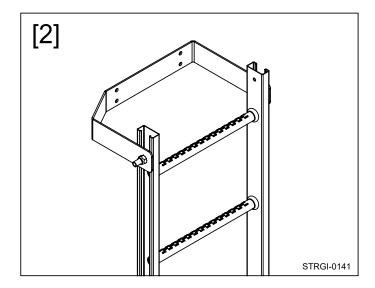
Typical Ladder Bracket to Ladder Installation with Ladder Clip and Bolt
